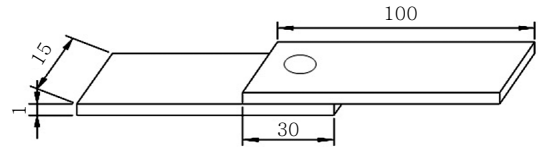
Dimensions and geometry of welding part of lightweight alloy sheets specimen used
